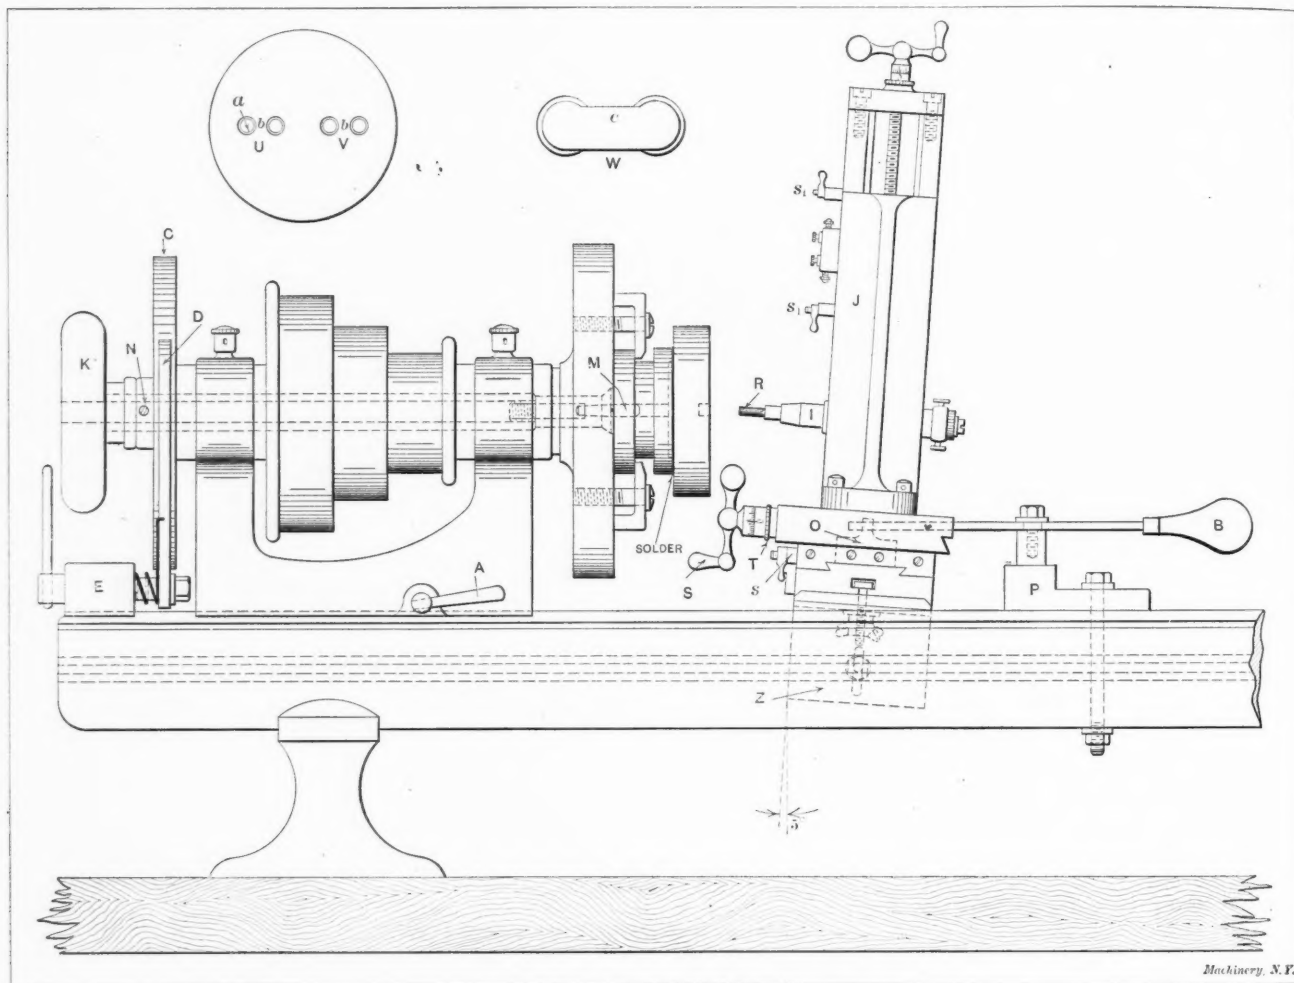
Bench Lathe equipped with Indexing and Milling Attachments
